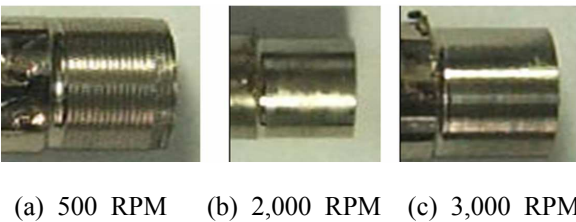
Appearances of $Zr_{50}Cu_{40}Al_{10}$ BMG specimens machined using a Cermet tool at each rotation speed
